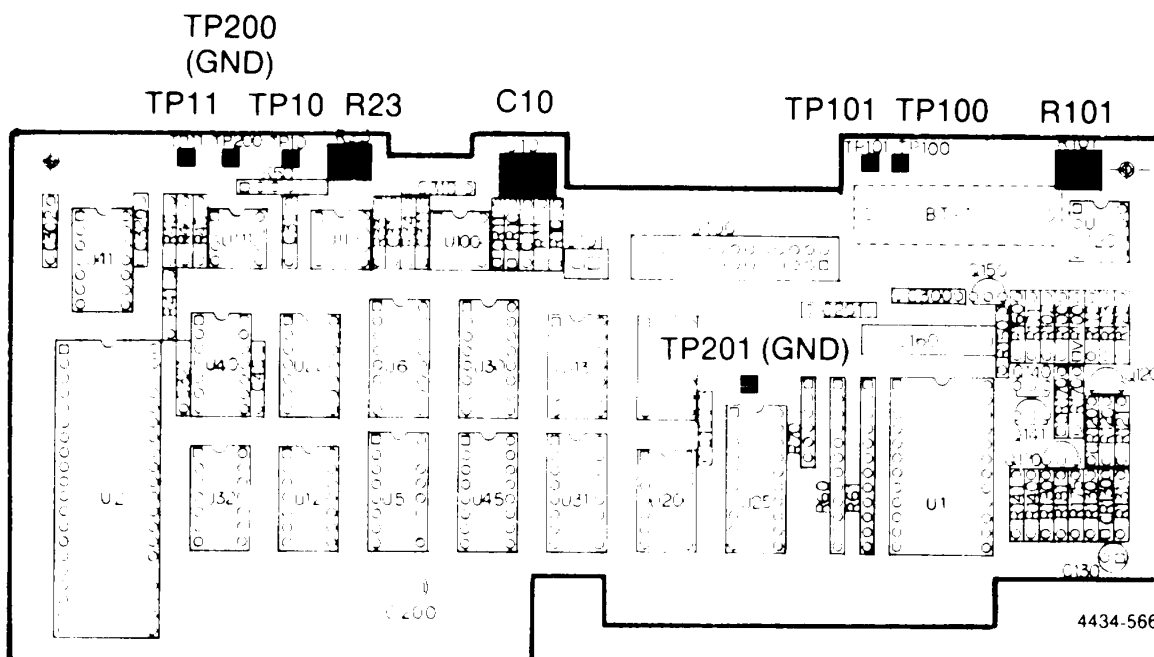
318 Side view of A07, Serial Analysis/RS-232C/NVM board.
